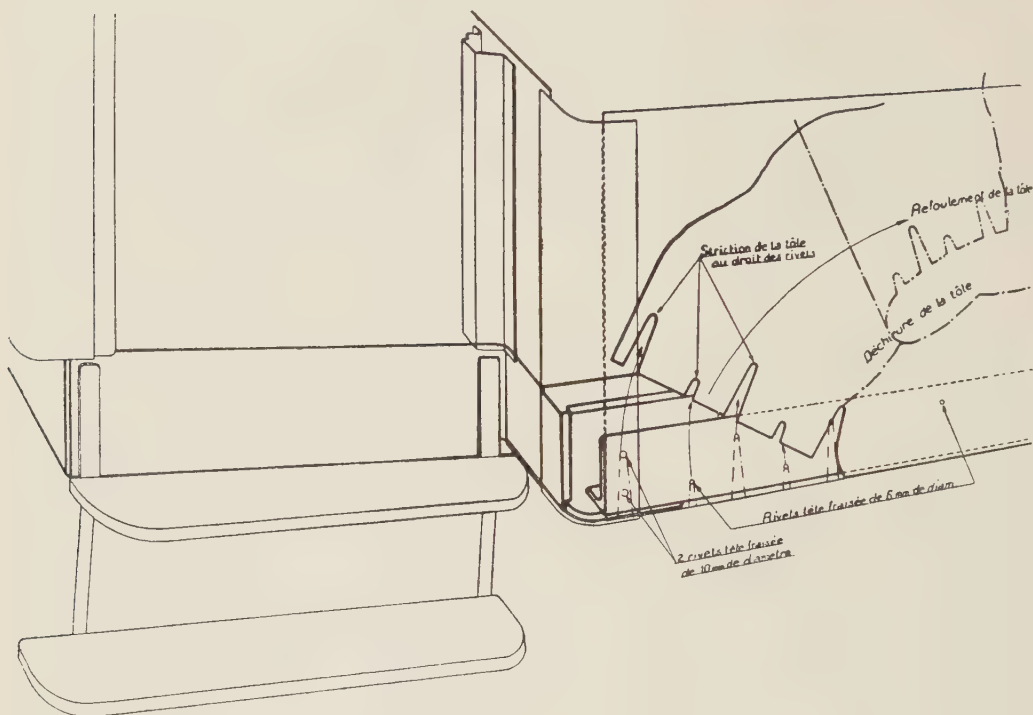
Illustration of tearing apart of a riveted assembly.
